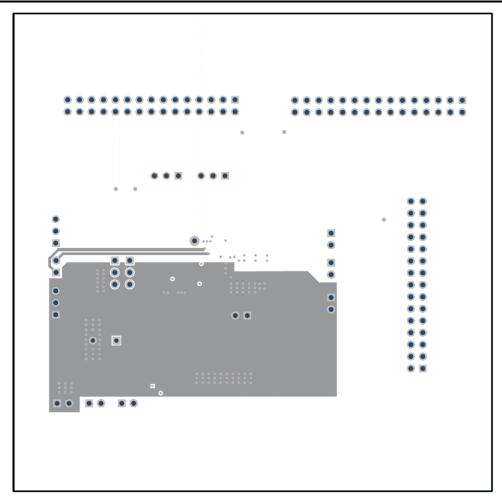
TPS61094EVM-066 Inner Layer1 Layout
